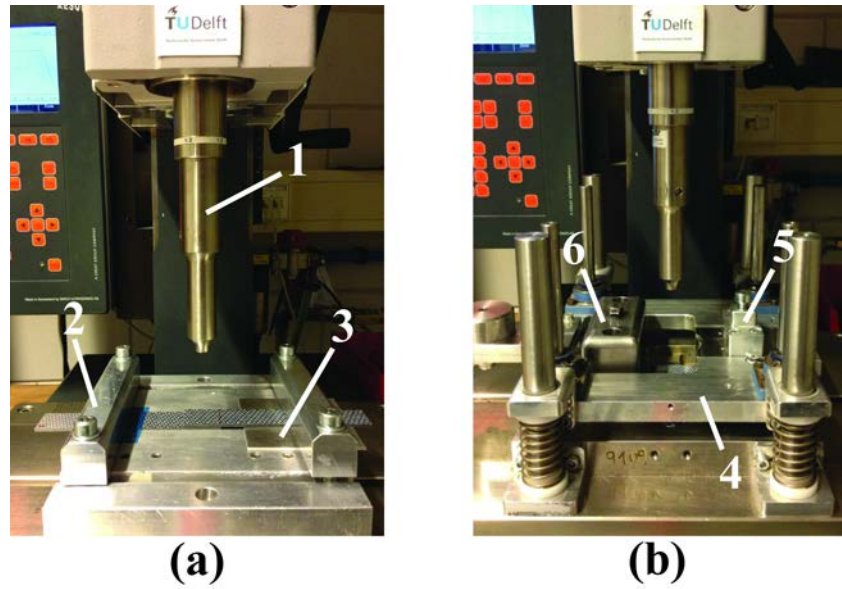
Ultrasonic welder, circular sonotrode and welding jigs used in this study: (a) Jig 1 and (b) Jig 2. 1: sonotrode, 2: bar clamp in Jig 1, 3: supporting plate, 4: sliding platform in Jig 2, 5: clamp for the top adherend and 6: clamp for the bottom adherend. (For interpretation of the references to colour in this figure legend, the reader is referred to the web version of this article.)
